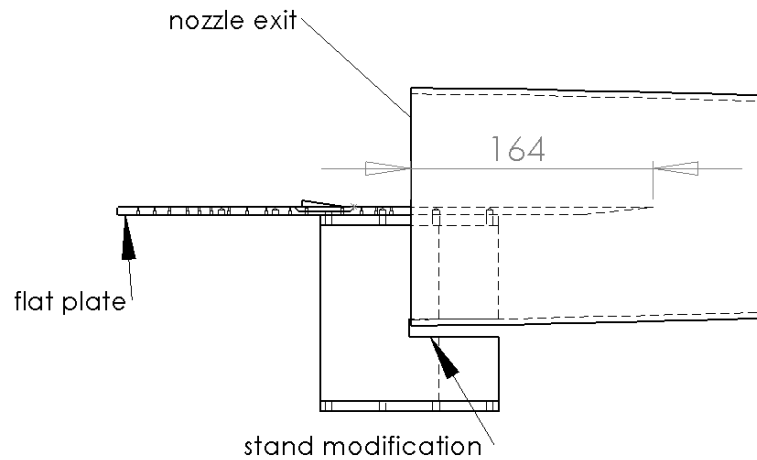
Leading edge of flat plate inserted 164mm inside the nozzle.
